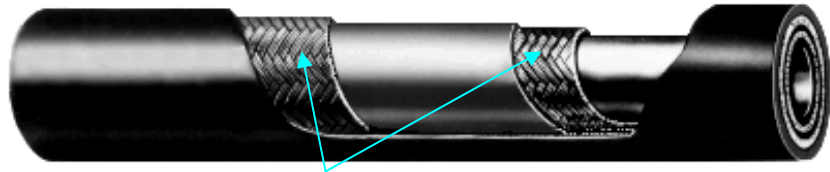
Two layers of braided reinforcing (2 wire hose)
